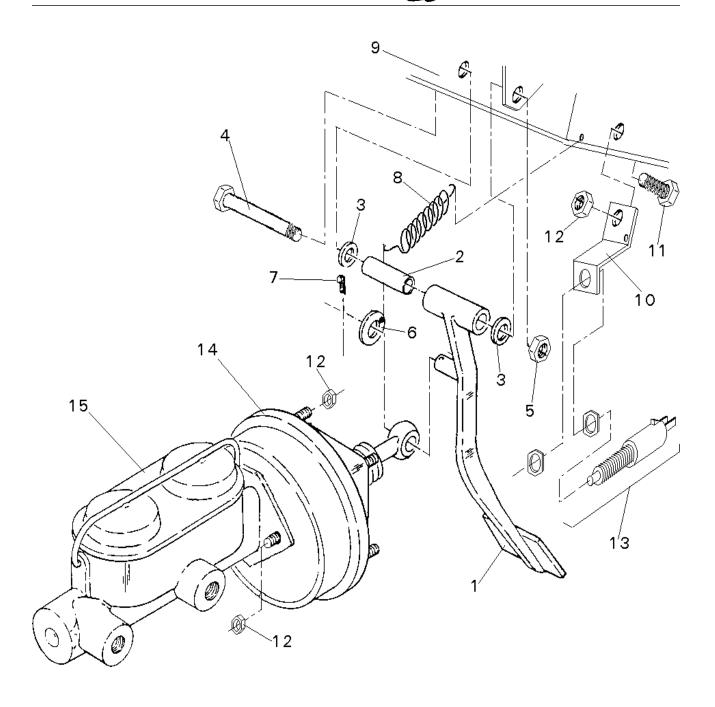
Brake Pedal, Booster and Master Cylinder Assembly
